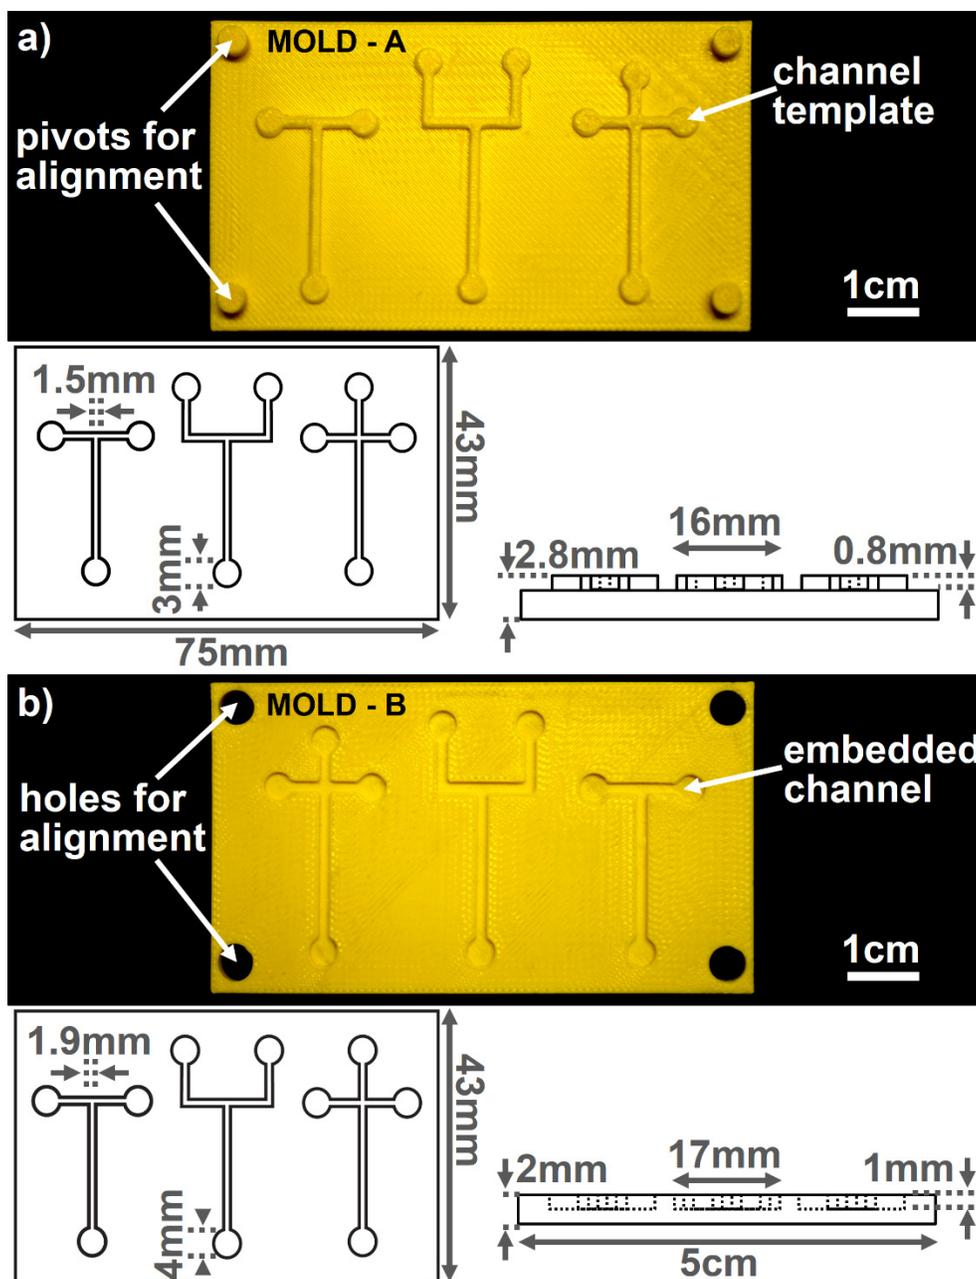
Dimensions and designs of molds used to make the 2D microfluidic devices by embossing paper. All molds were fabricated in ABS using a 3D printer.
